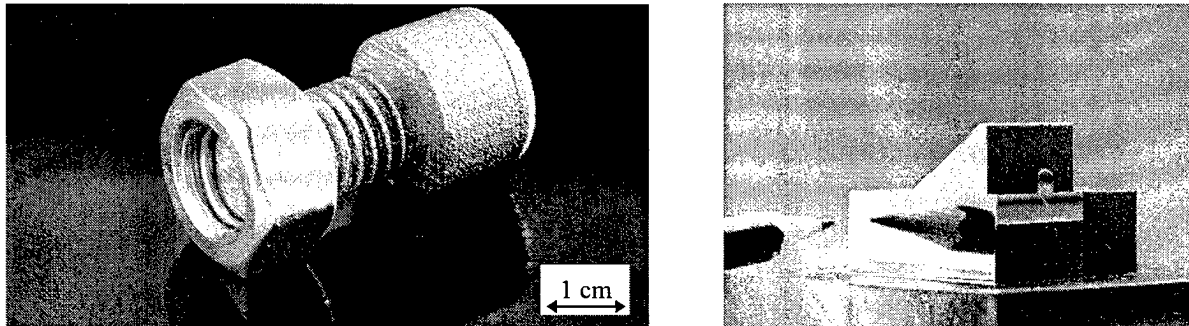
Test parts for the demonstration of accuracy and surface quality of the SLPR technique. Left: Screw M12 manufactured by SLPR out of 316 L. Nut can be screwed on by hand without any reworking at the screw. Right: Mirror-like surface of an SLPR-part by manual surface finish technique.
